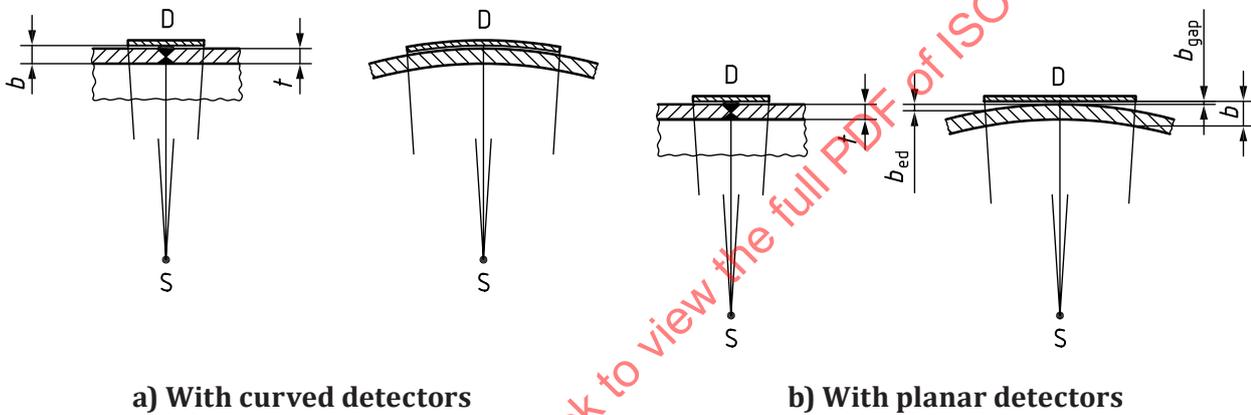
Arrangement for testing of set-on welds with a radiation source, located on the central pipe axis and perpendicular to the weld centre, and the detector outside
